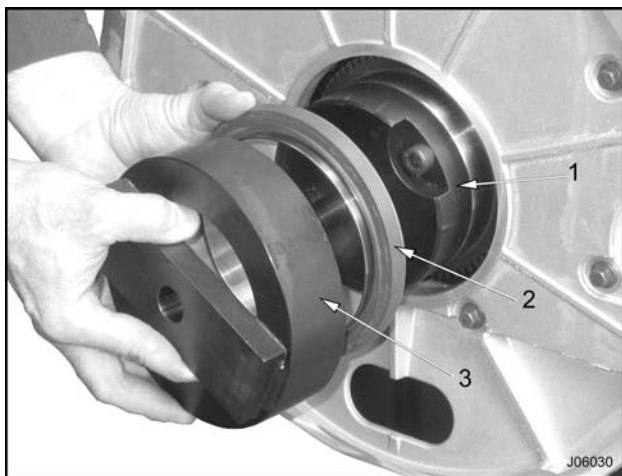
Installing the Rear Seal / Wear Sleeve Installer
